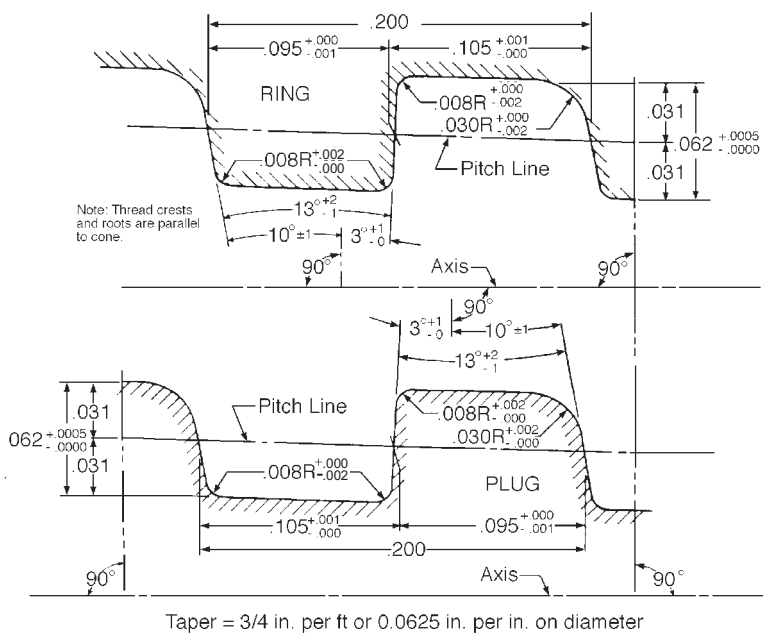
Gauge Thread Form and Dimensions for Buttress Casing
